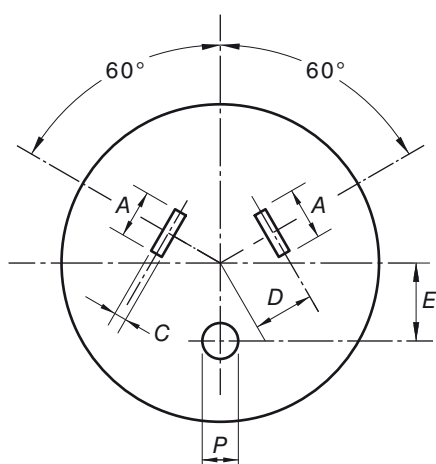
(in part) DIMENSIONS OF PLUGS
